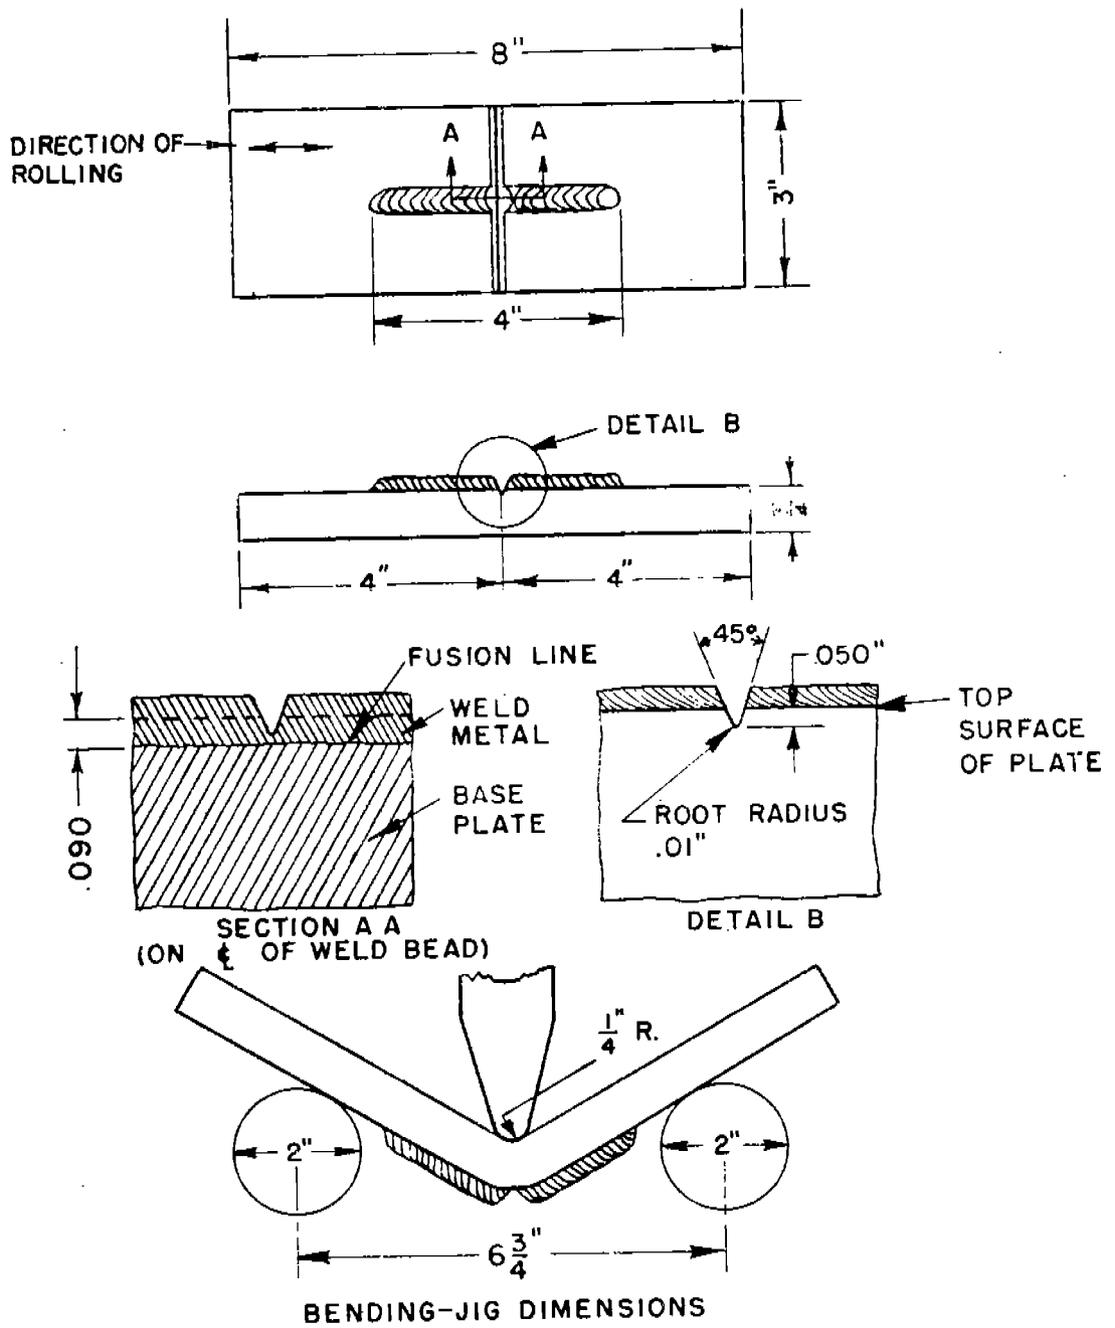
BEND SPECIMEN WITH LONGITUDINAL WELD BEAD AND TRANSVERSE NOTCH (KINZEL DESIGN)
